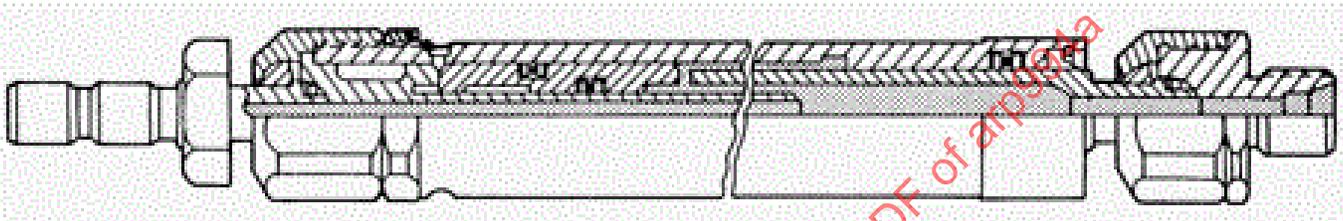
HYDRAULIC EXTENSION UNIT
